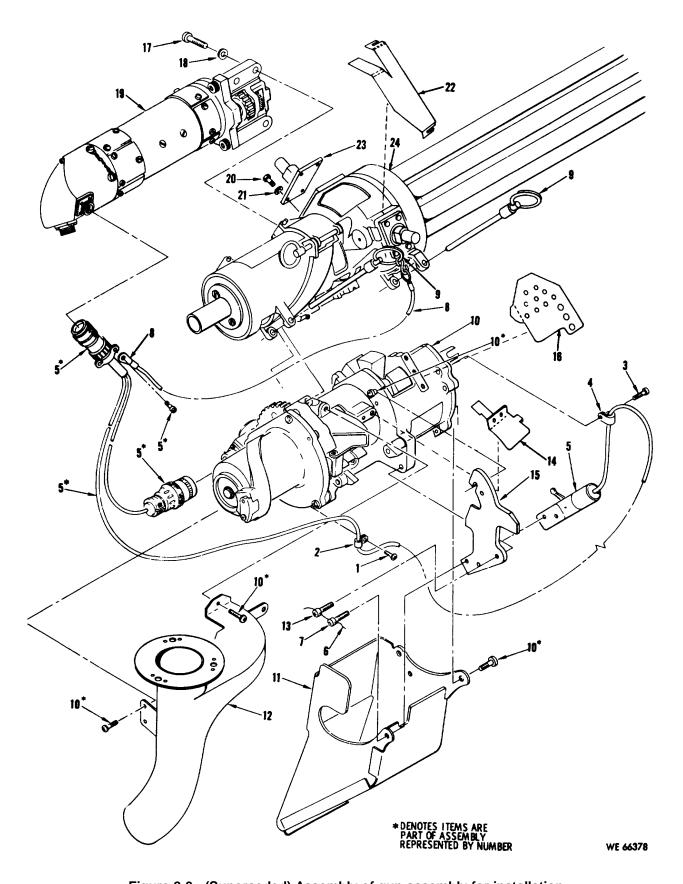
(Superseded) Assembly of gun assembly for installation.
